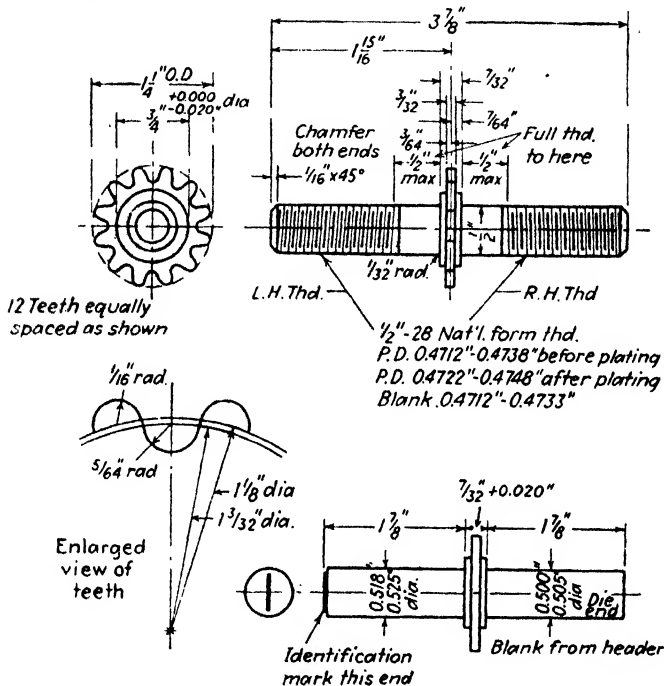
Brake-adjusting part with flange headed at center. Serrations trimmed later.
